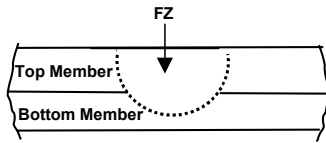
Spot lap joint. Joint penetrates into bottom member.
